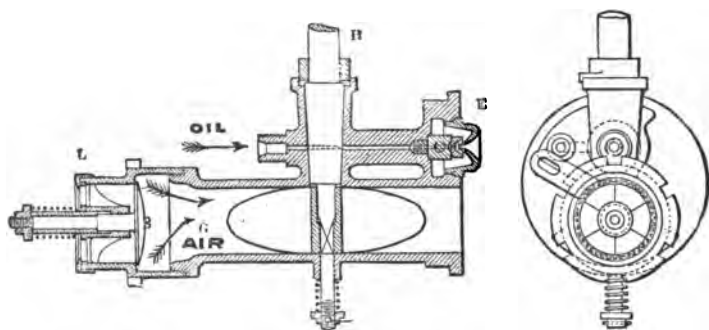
Section and End View of Spray Maker of Priestman Engine.
